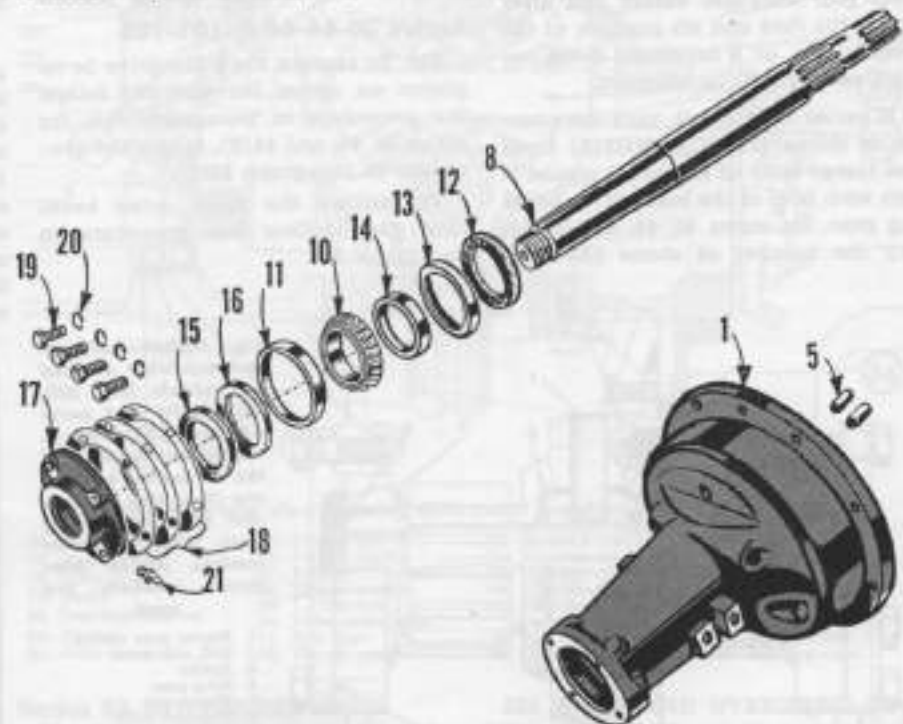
Exploded view of typical axle shaft and sleeve assembly as used on models 20, 20K, 22, 22K, 81 and 82.
